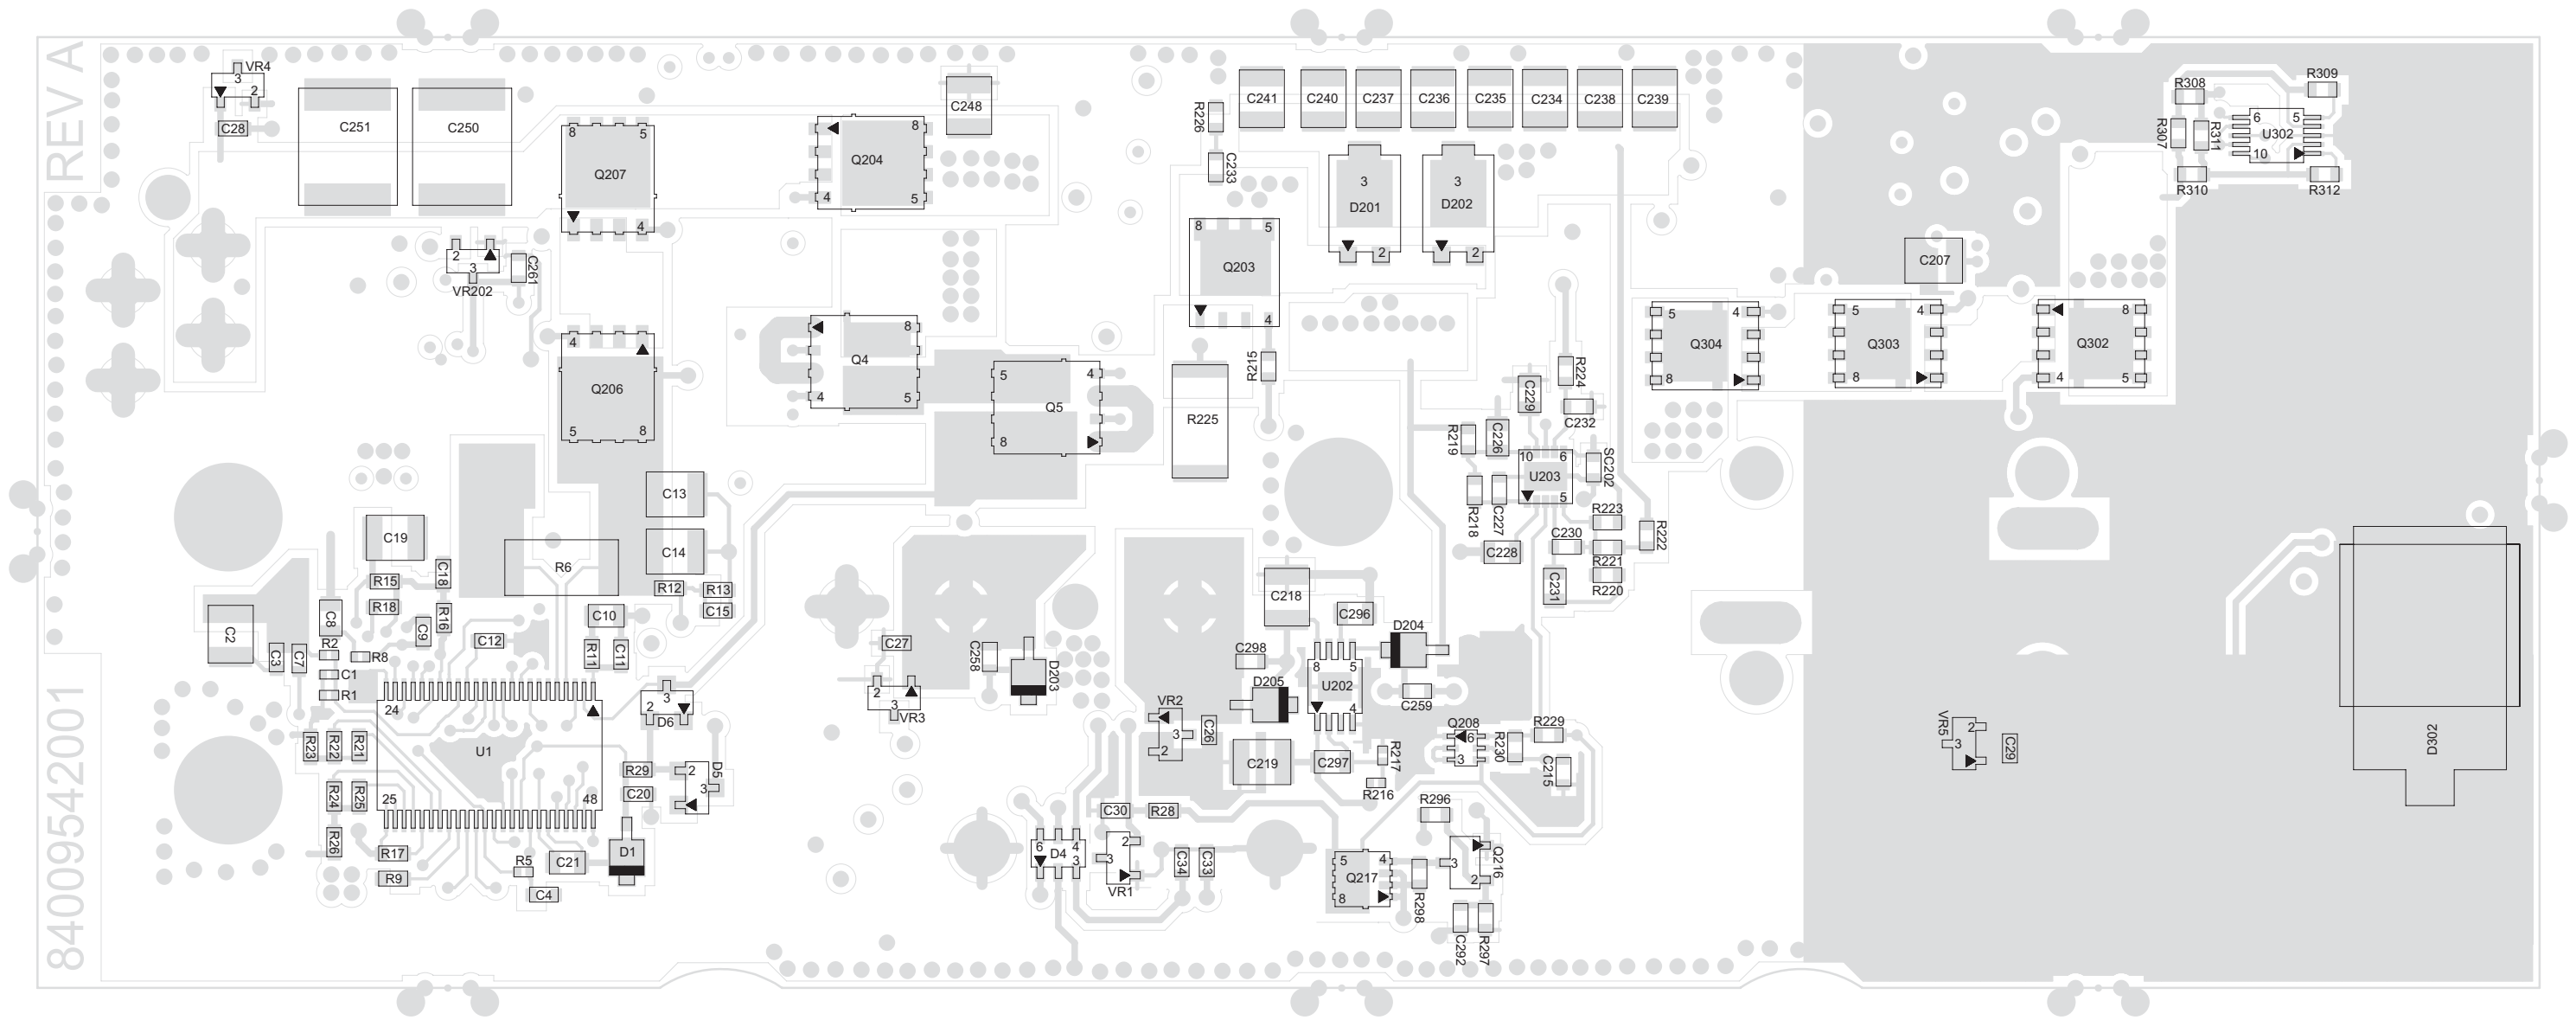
84009542001 Charger Board Layout - Bottom
